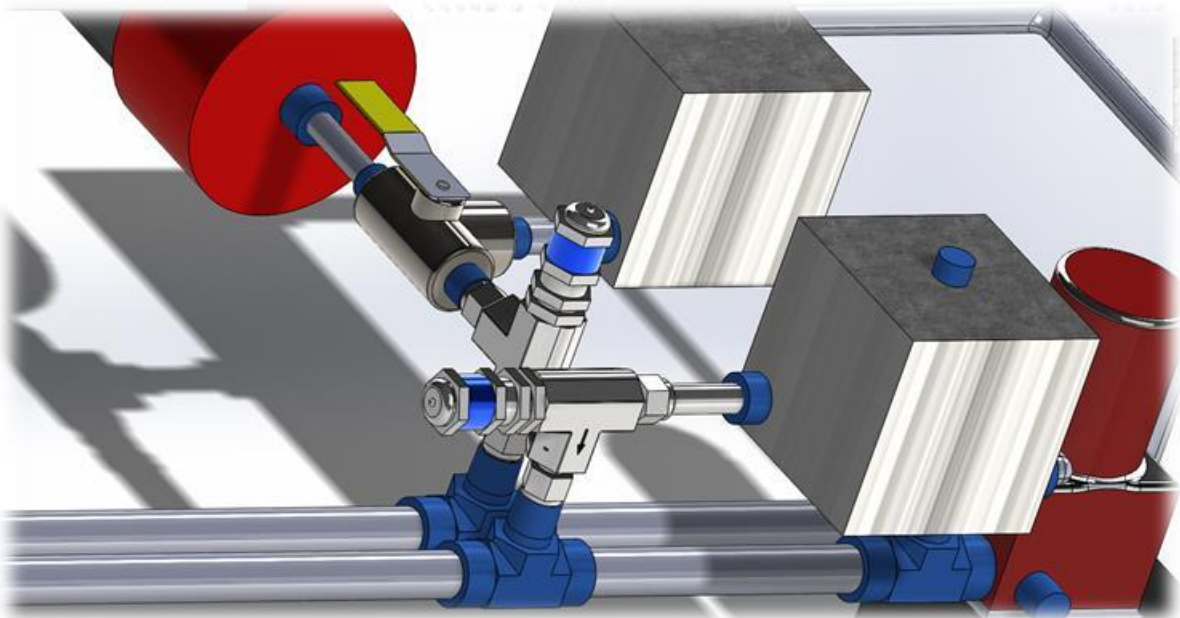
Alternative view of 3D rendering of complete damping cylinder
